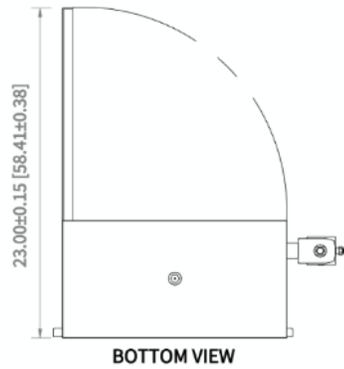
Model 132S External Components & Dimensions/Clearances Inches [cm]
